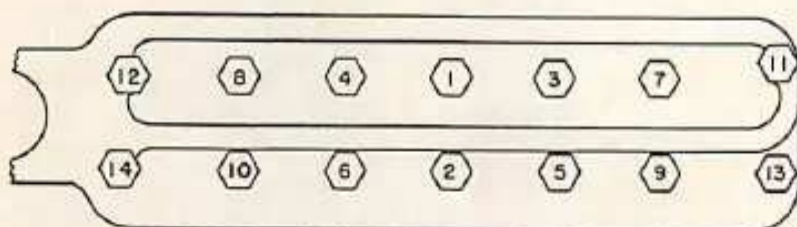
Cylinder head tightening sequence for Series 1650 diesel engines only. Tighten all capscrews to a torque of 129-133 Ft.-Lbs.
